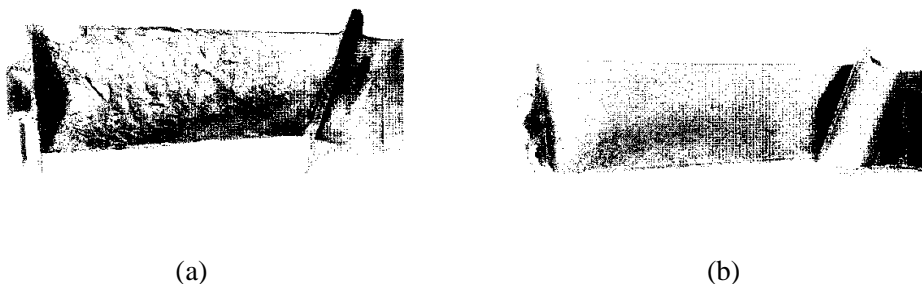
Examples of uncoated (a) and aluminised (b) gas turbine blades after hot corrosion operation (by courtesy of Rolls-Royce)
